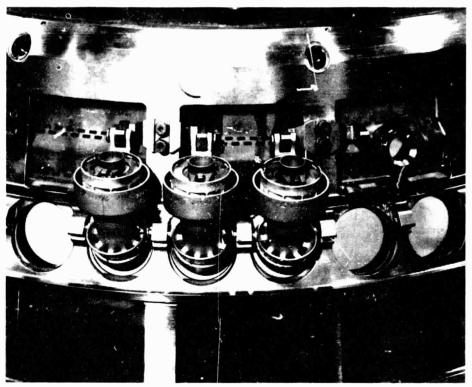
Outer Combustor Support Frame with several Advanced Liner Segments Installed and several Carburetor Tube Assemblies Mounted
